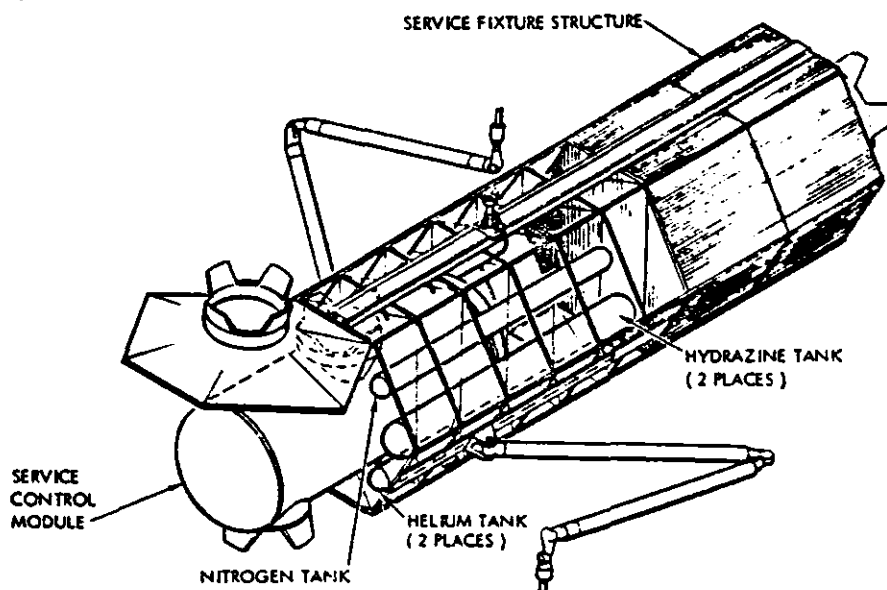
SERVICE FIXTURE PACKAGING CONCEPT
